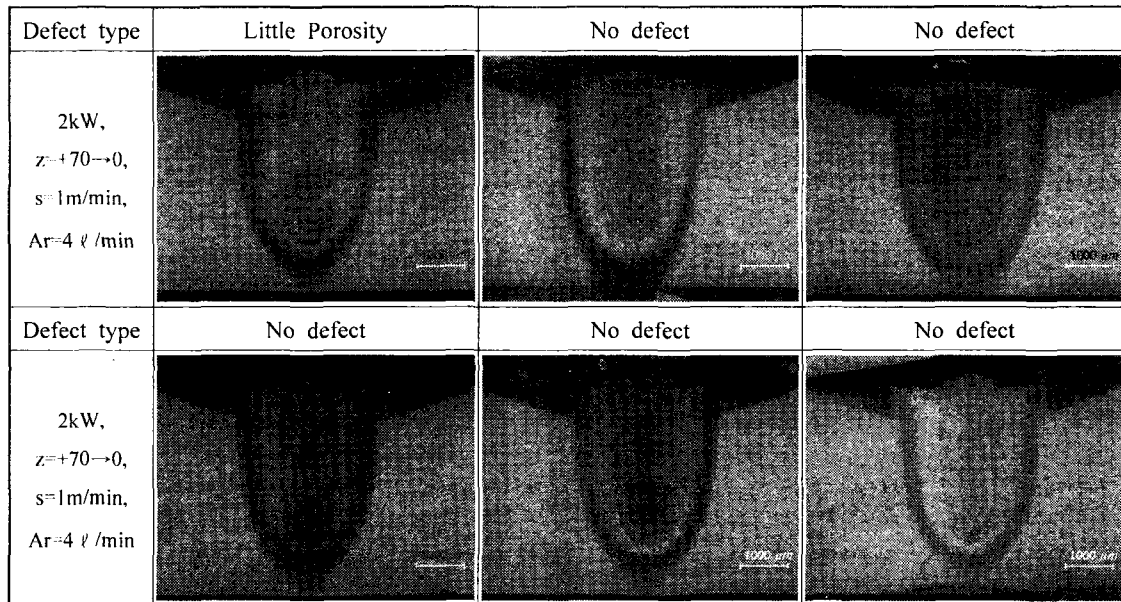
Welding cross-sectional area after Heat treatment ($z= +70 \rightarrow 0$)
